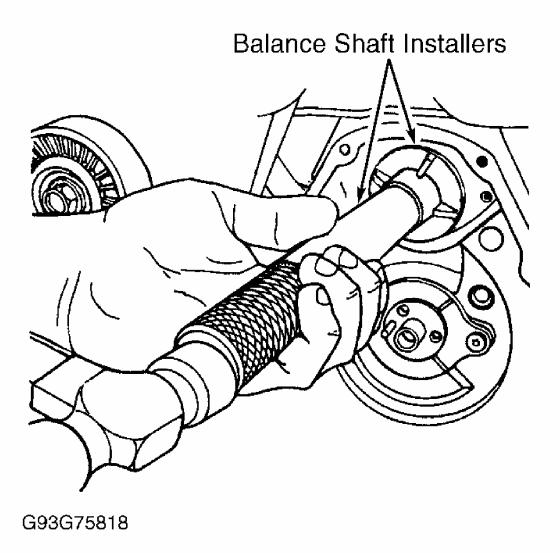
Installing Balance Shaft Courtesy of GENERAL MOTORS CORP.
